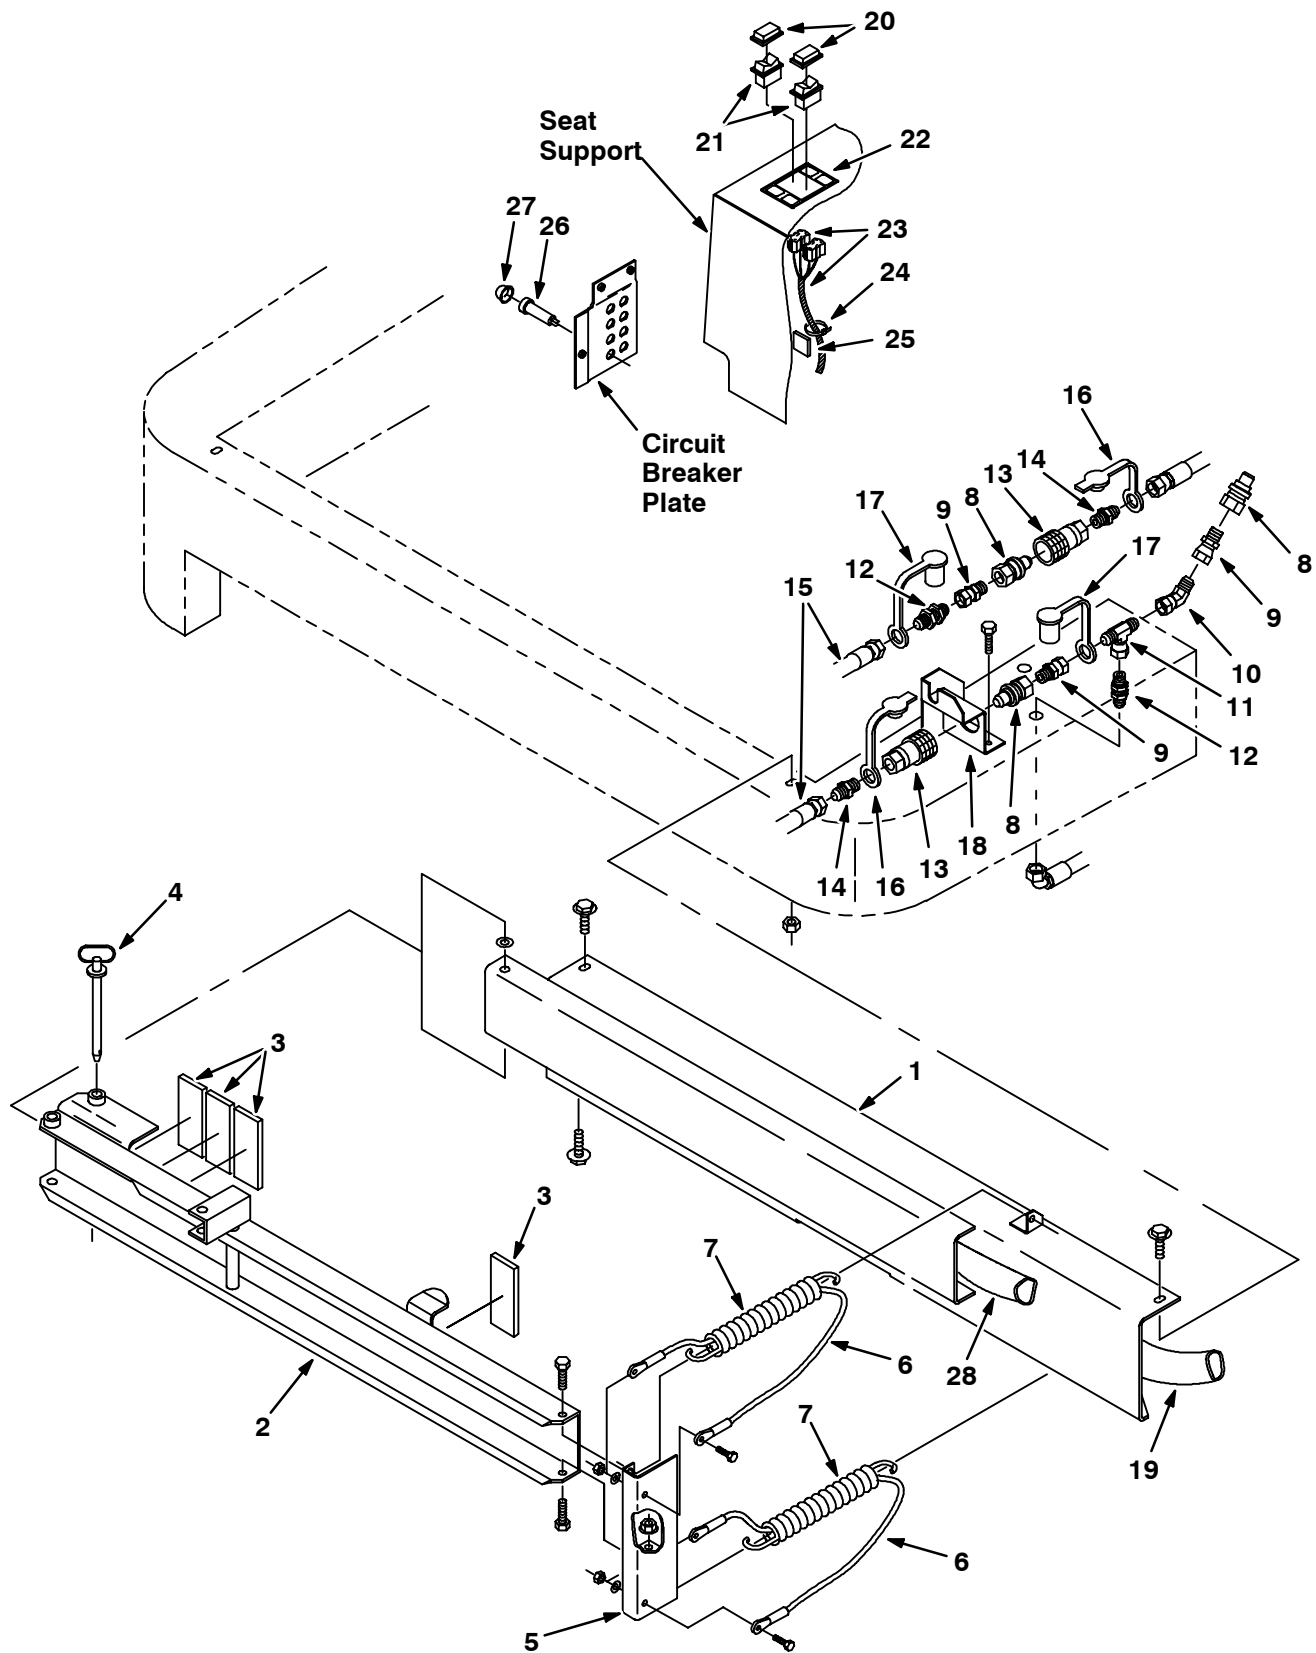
Auxiliary Side Brush Bumper and Hydraulics Group
